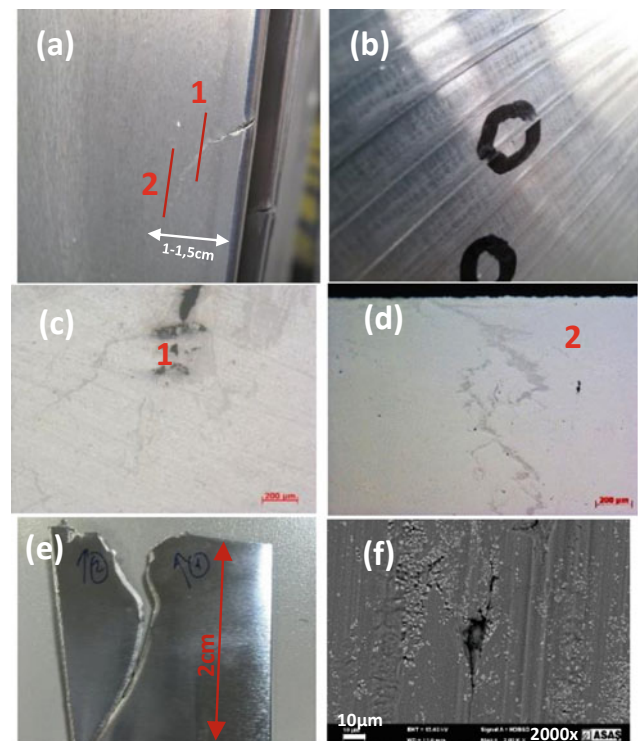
Macro-images of; a as-cast sheet material edge, without any edge trimming. b Edge trimmed as-cast coil side surface. Optical microscope images of samples; c close to the crack tip marked with redline 1; d away from the crack tip marked with redline 2; e macro-image of crack formation on the edge of strip; f BSE images of crack area
